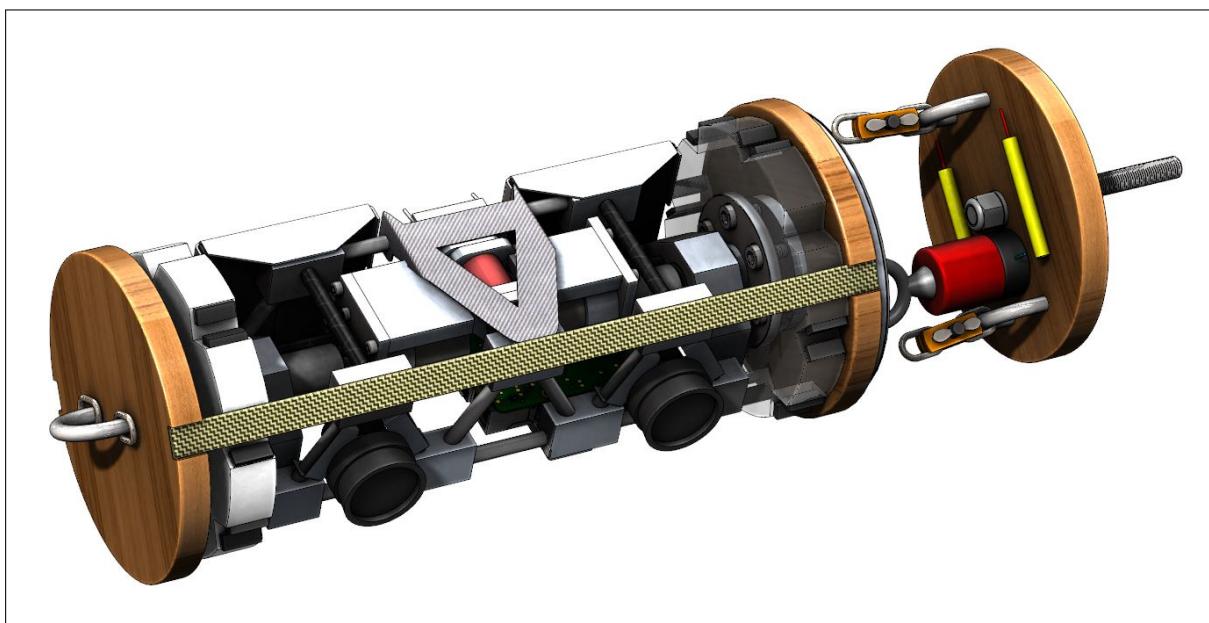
Payload Bay CAD Assembled (Carbon Fiber Wrap Not Pictured)
